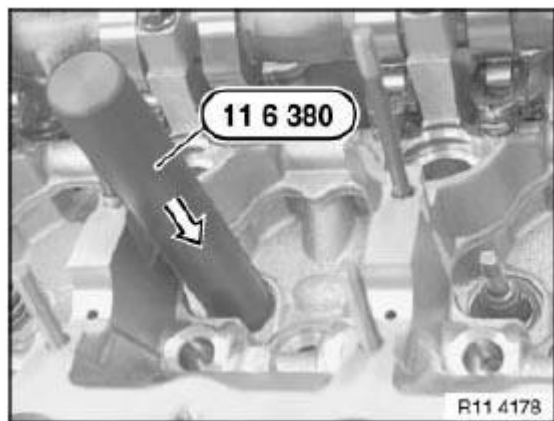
Pressing Valve Stem Seal Using Special Tool 11 6 380
